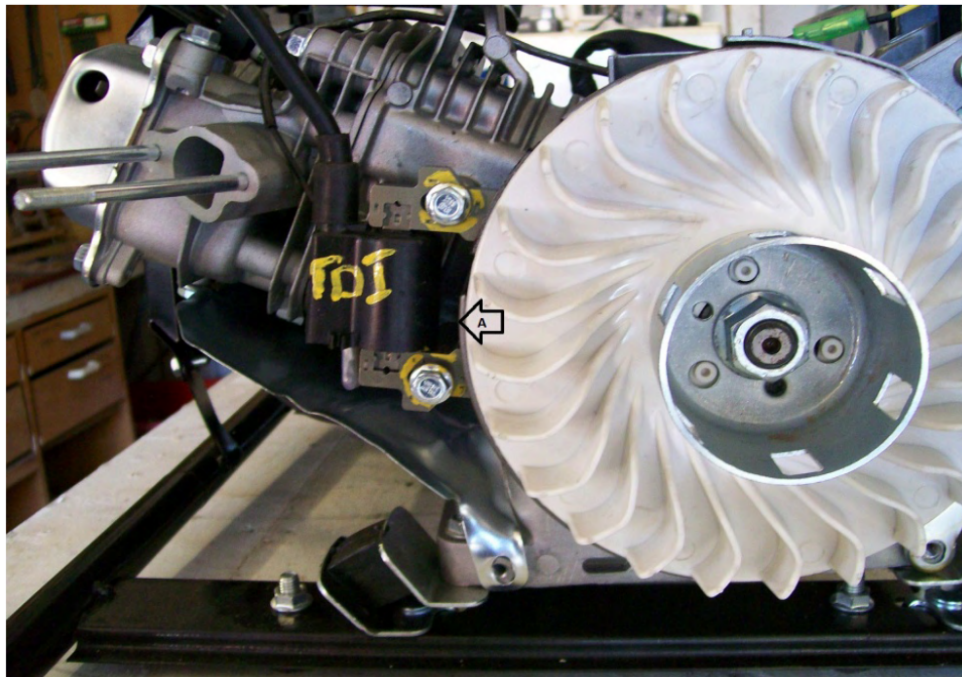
This is the engine with starter pull and blower cover removed. At “A” you can see the magnetic pulse type Transistor Discharge Ignition (TDI) pick-up in its original position, bolted in place at 8 degrees before Top Dead Centre.
